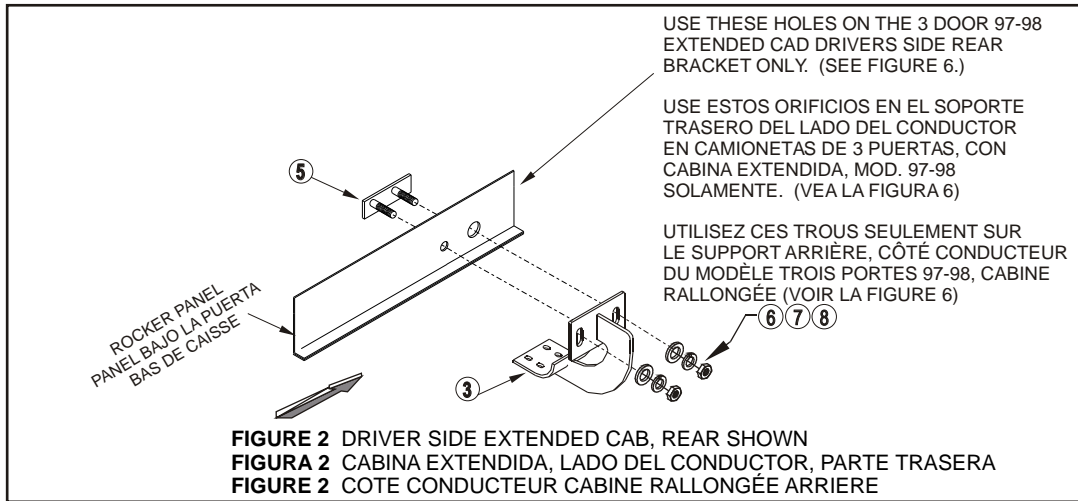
DRIVER SIDE EXTENDED CAB, REAR SHOWN
